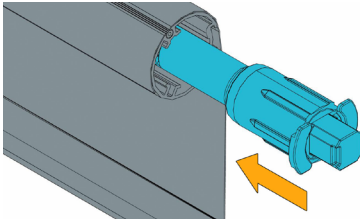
Installing M-OP bearing into the M-TNR tube with curtain
